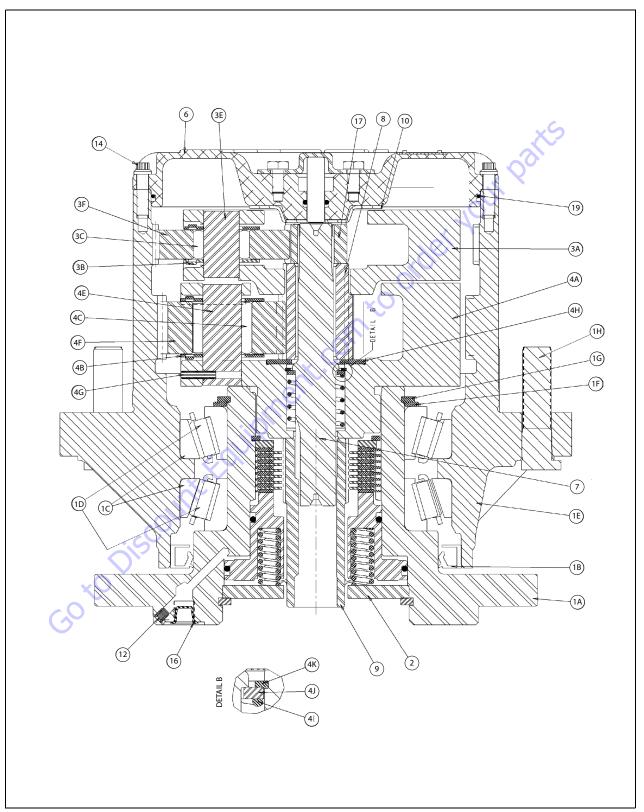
Assembly Drawing - With Integral Input Brake - Sheet 1 of 2
